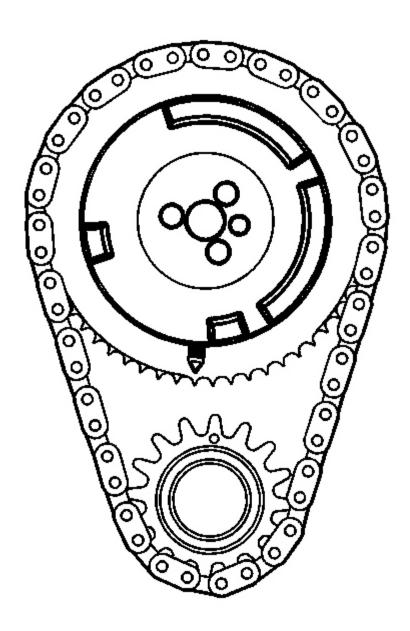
View Of Sprockets & Chain Courtesy of GENERAL MOTORS CORP.
